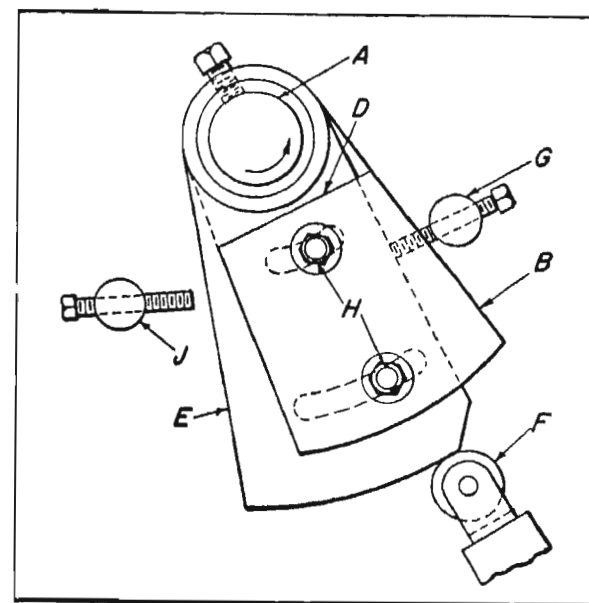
Cam-plate *E* Shown in Fig. 24 has Here Moved to Right so that Valve Plunger Supporting Roller *F* is Depressed and Air is Admitted to Cylinder.
